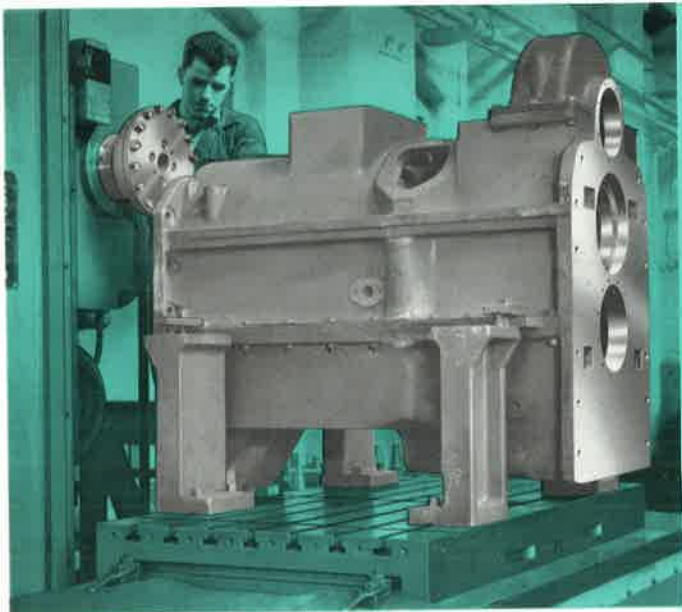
Milling and boring speed reducer gear box for large marine diesel engine.
